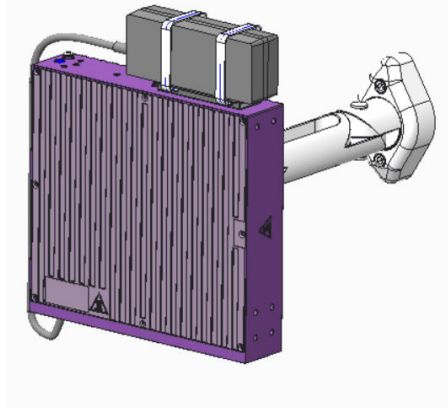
V300-8P/8T-2X VESA Mounting with PSU
